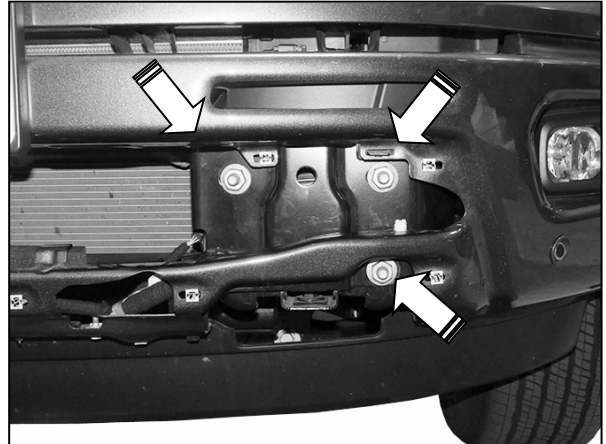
Remove the center plastic cover from the factory bumper (arrow)
